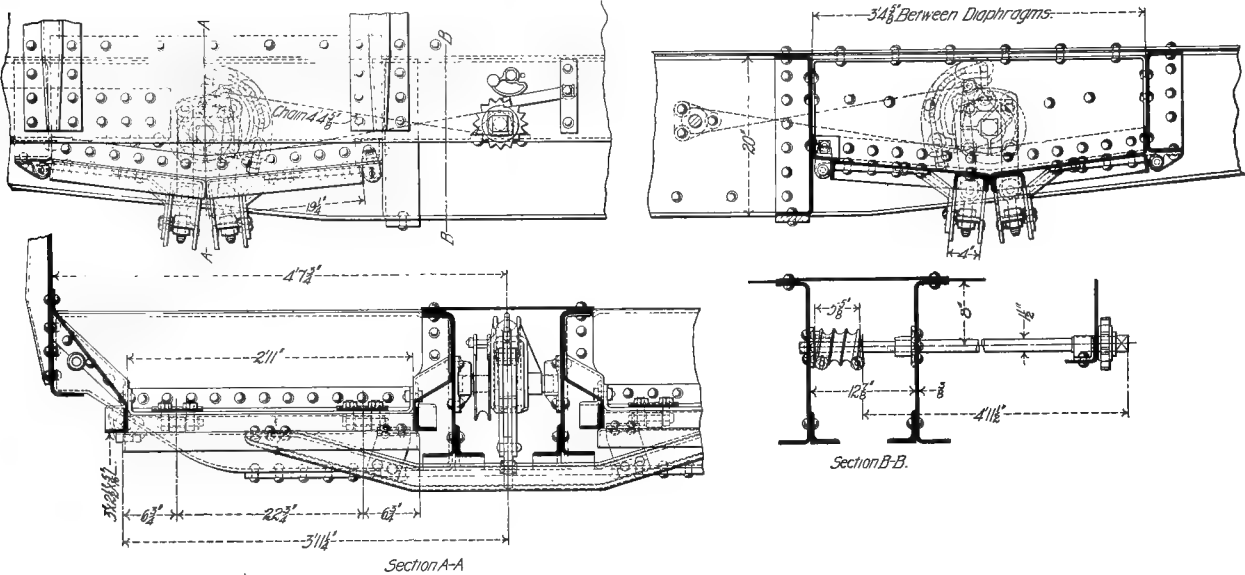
Lind Drop Door Apparatus for All-Steel Hopper Bottom Gondola Car. Pressed Steel Car Company.
